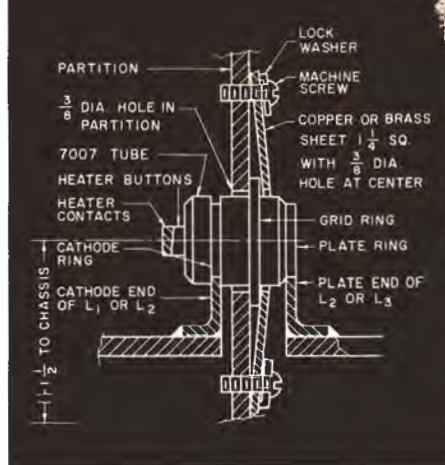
DETAIL DRAWING for mounting the 7077 tubes. The clamping plate can be fastened either with machine or self-tapping screws 1/4-inch long.
